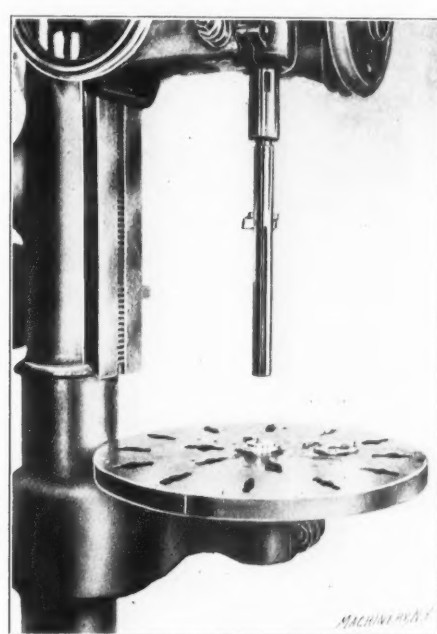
Method of Guiding the Boring-bar while boring Drill Press Base.
